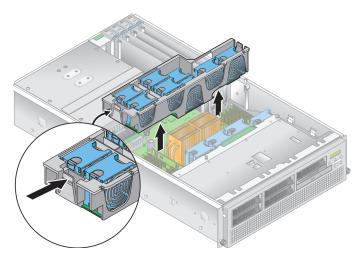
Removing the Sun Fire V40z Rear Fan Cage Assembly
